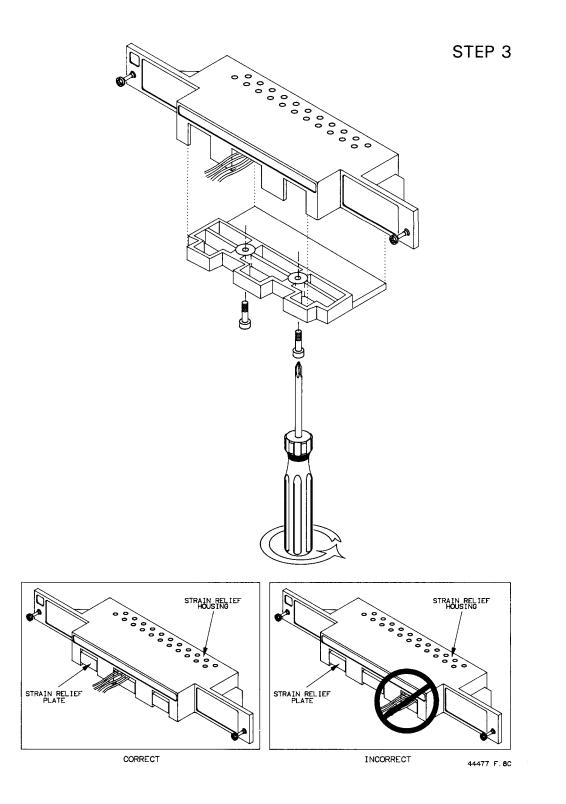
Type A Screw Terminal Block Wiring (Cont'd)
